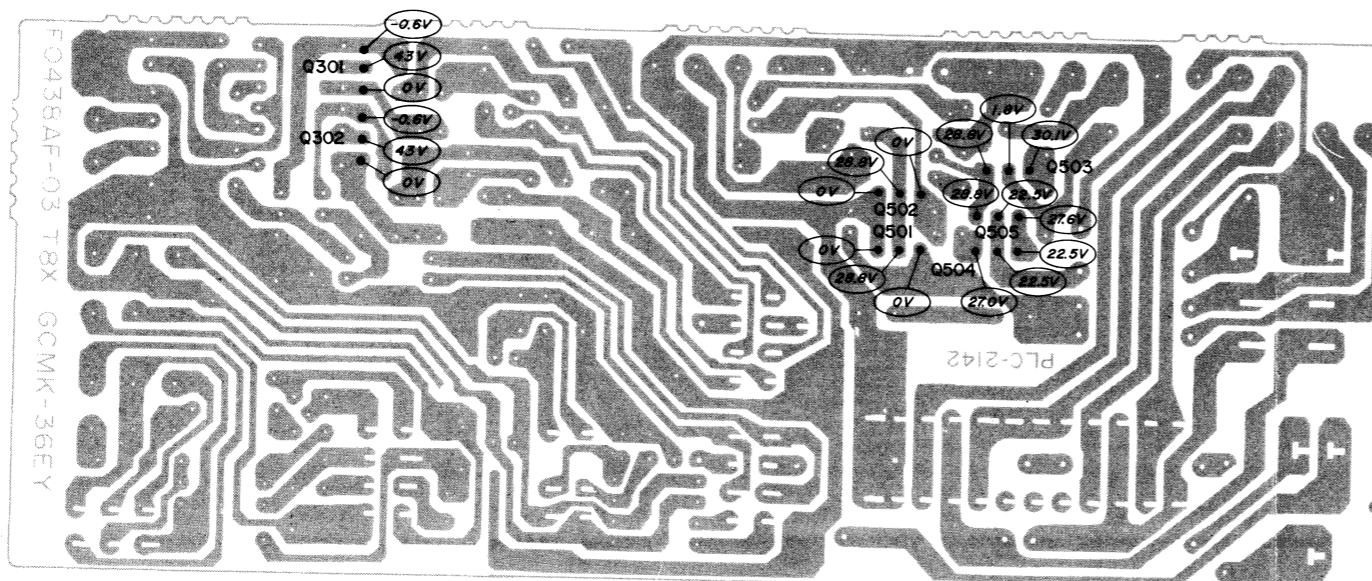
WIRING SIDE OF TONE/FILTER CIRCUIT PRINTED WIRING BOARD
